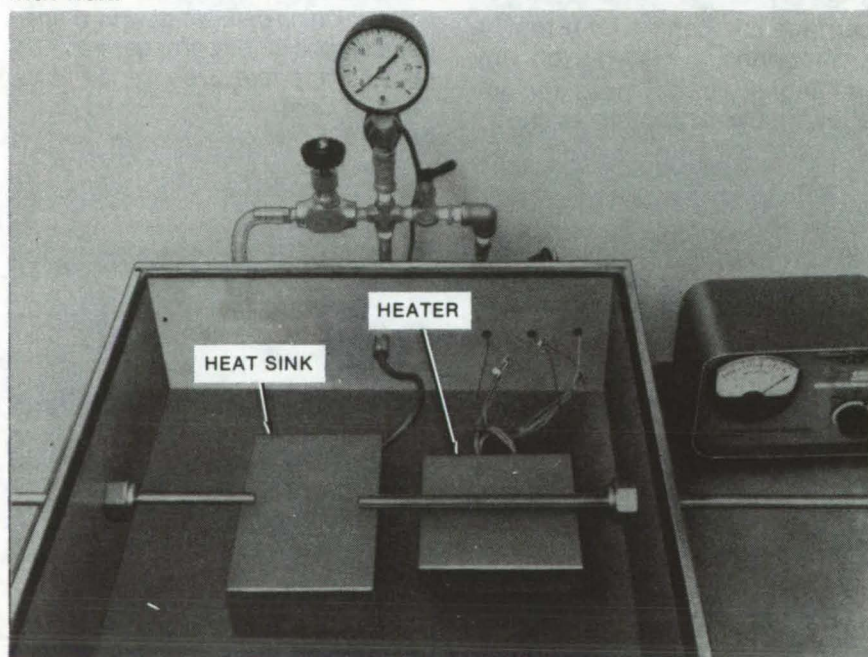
The Vacuum-Soldering Chamber contains a heater, a heat sink, and push rods for manipulation of the solder fixture.
